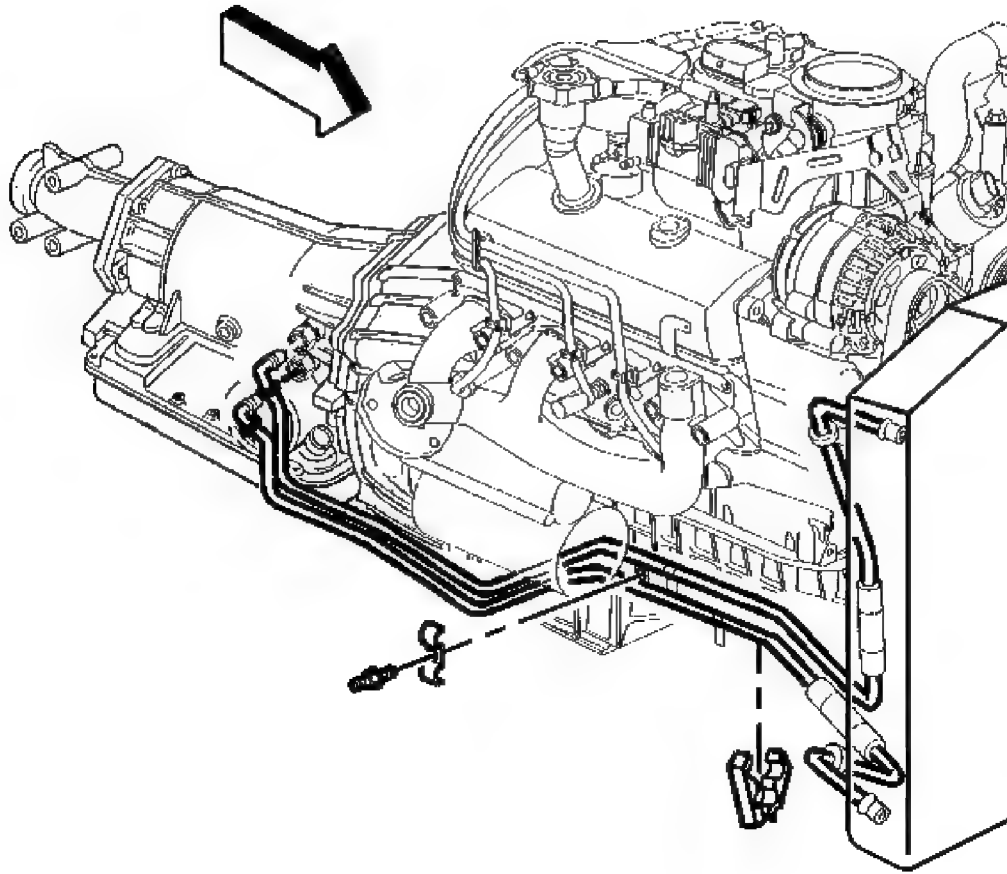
Locating Bracket For Starter Wire Harness & Transmission Oil Cooler Pipes
